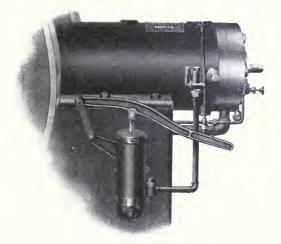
Starting Gear of the Fairbanks-Morse Engine.
